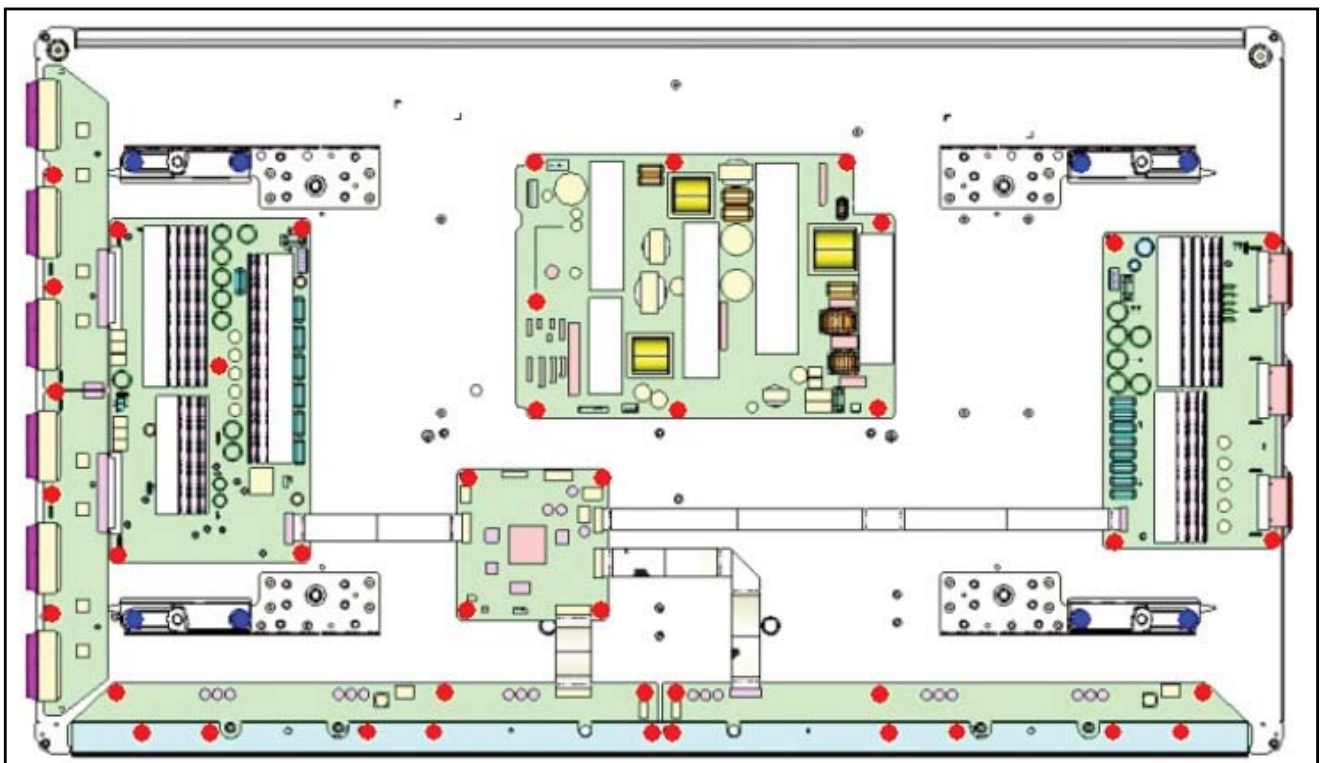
Photo 2 - Exchange of LBE and LBF board 50" HD W2
